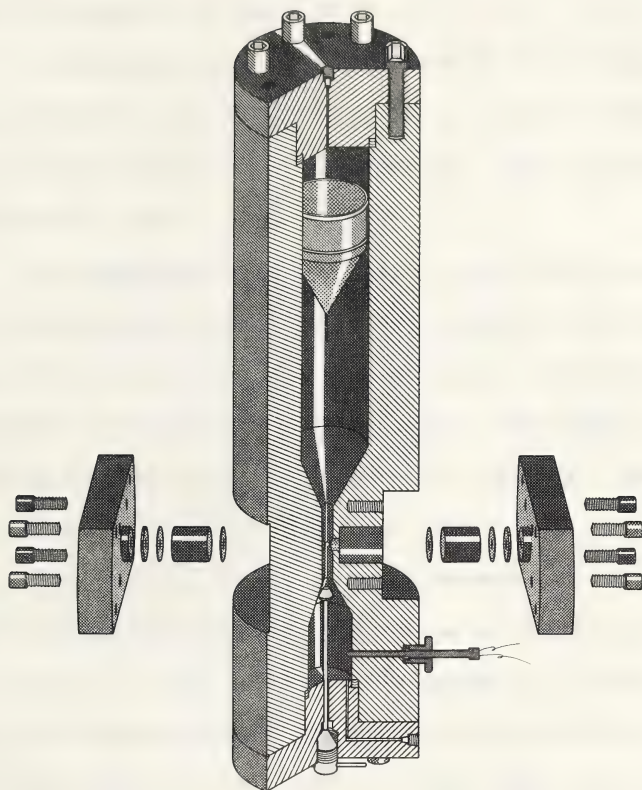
ASSEMBLY VIEW OF EQUILIBRIUM CELL
